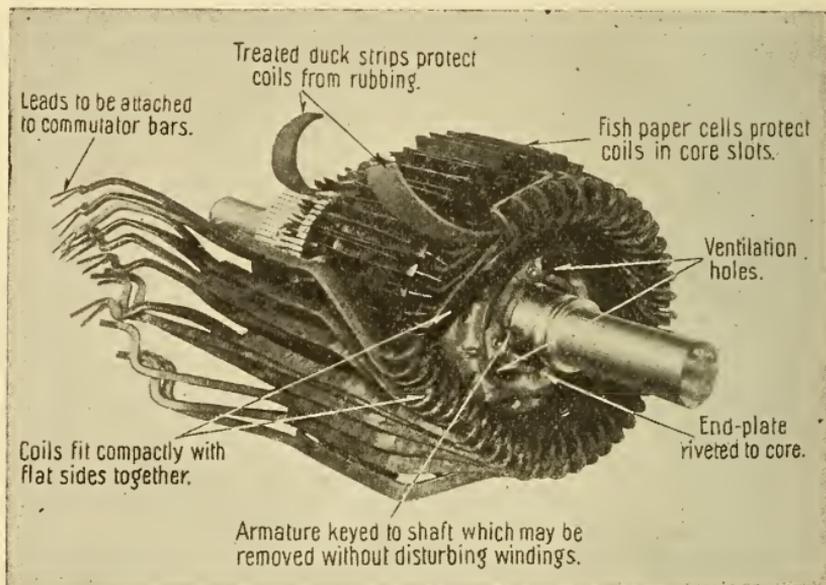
Partly-wound Armature Showing Method of Assembling Coils.
